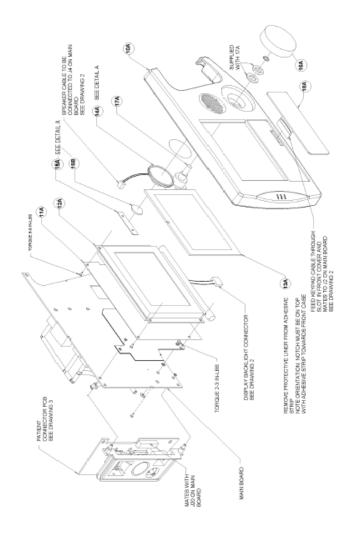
A1 Front Case Assembly Drawing (1 of 3)
